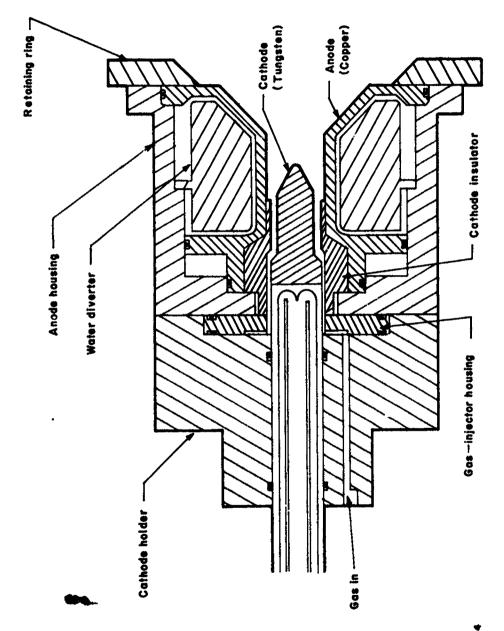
SCHEMATIC DRAWING OF X-7C MPD THRUSTOR
